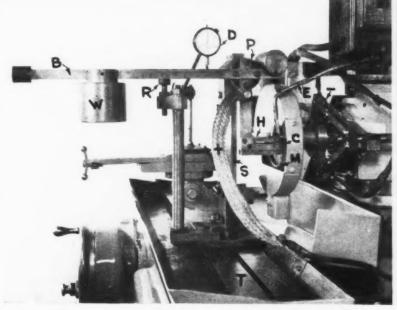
FIG. I—Constant pressure device set up on Norton tool and cutter grinder to simulate off hand grinding of cemented carbide cutting tools.
